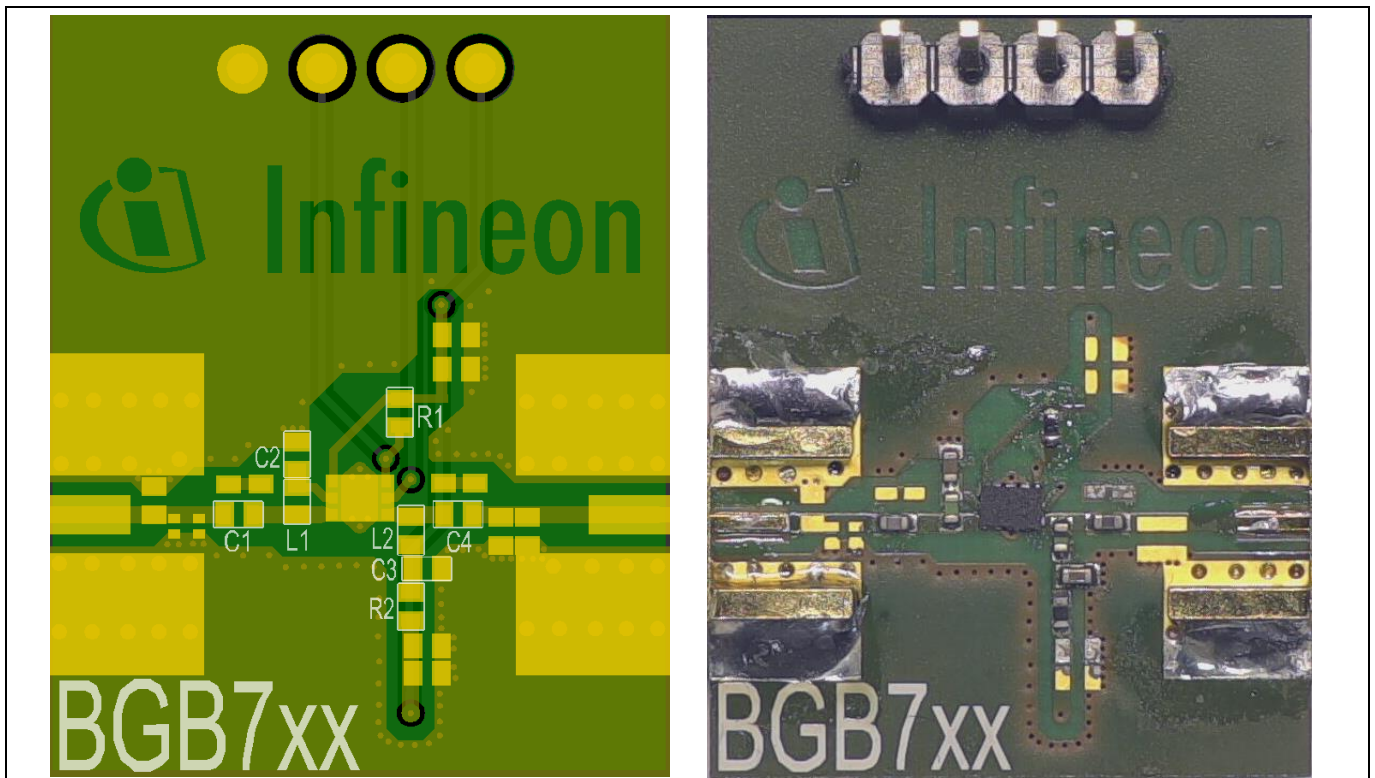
PCB layout and photo of the [BGB741L7ESD](#) wide-band GNSS LNA evaluation board
